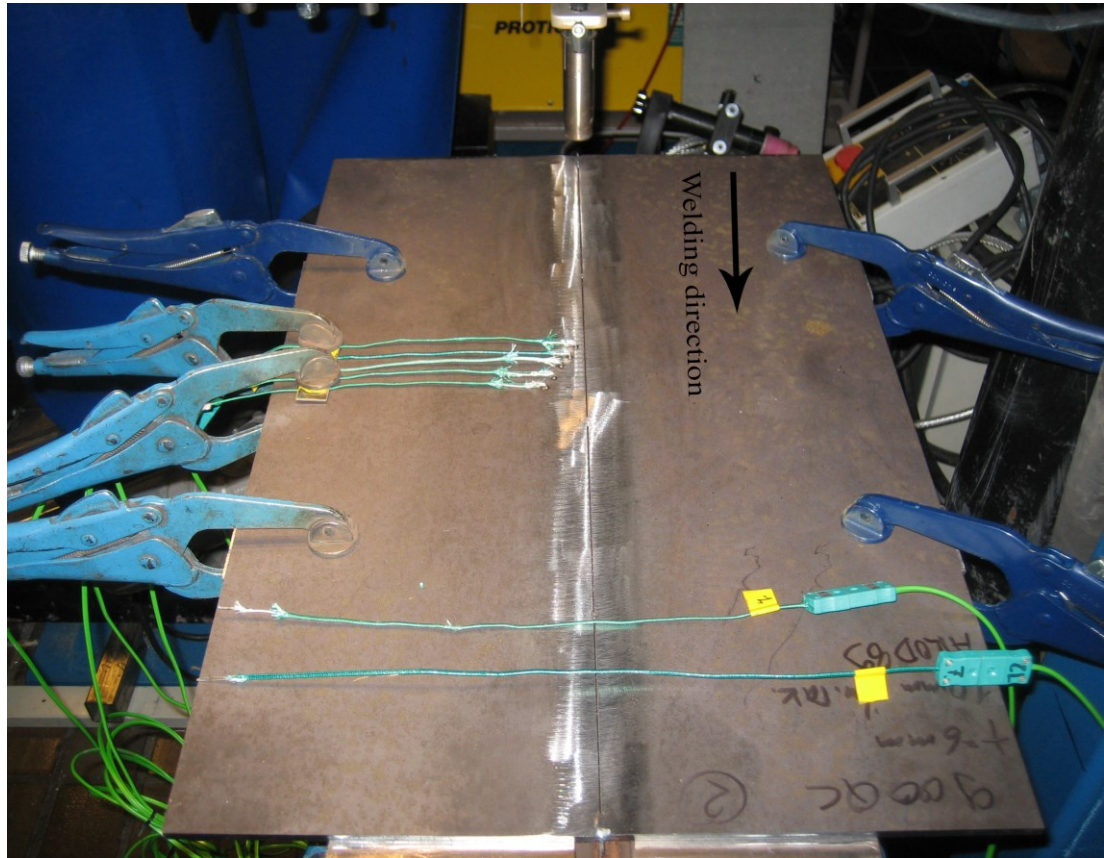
Test plates clamped and prepared for MAG welding. Thermocouples were used for cooling time measurements.
